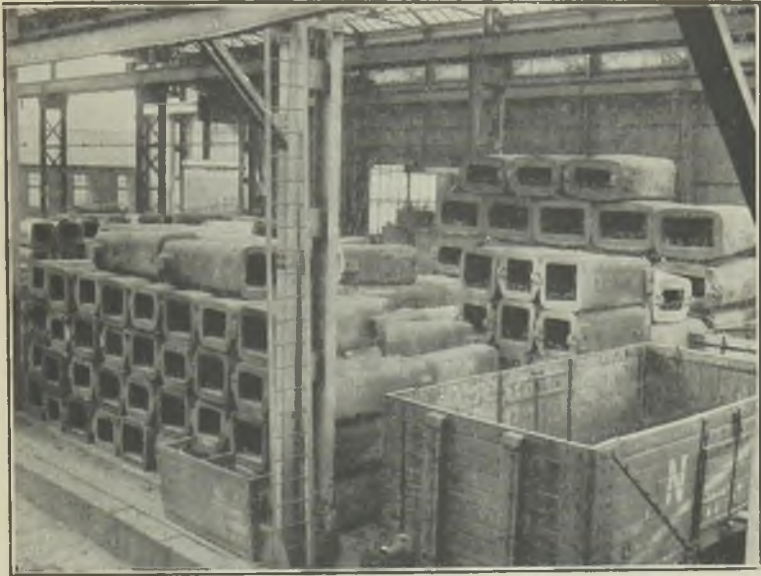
SHOWS A STOCK OF ABOUT 2,000 TONS OF INGOT MOULDS.
